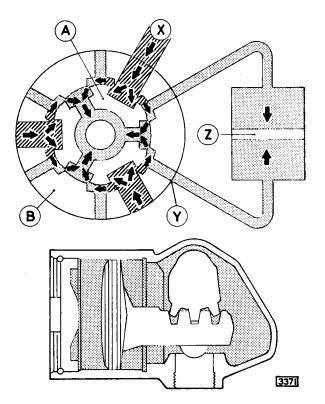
Operating diagram of the rotor valve (straight ahead)
